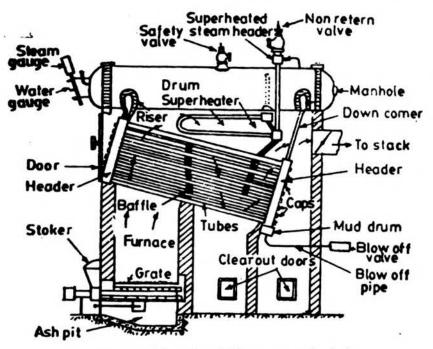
Babcock and Wilcox water-tube boiler.
